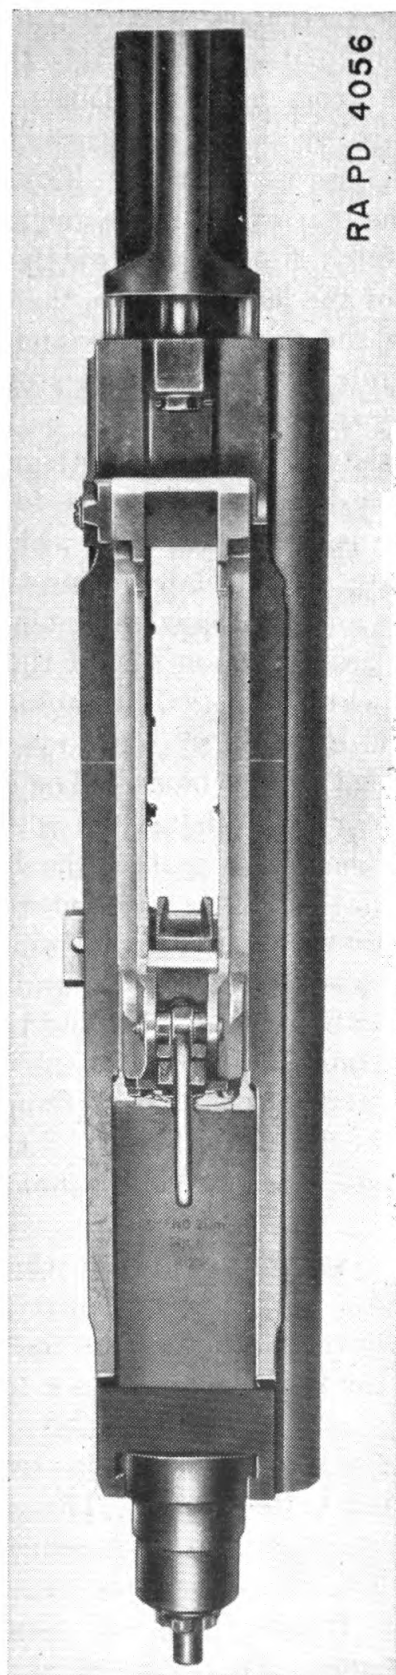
20-mm automatic gun M2, top view, cocked position, close-up.
